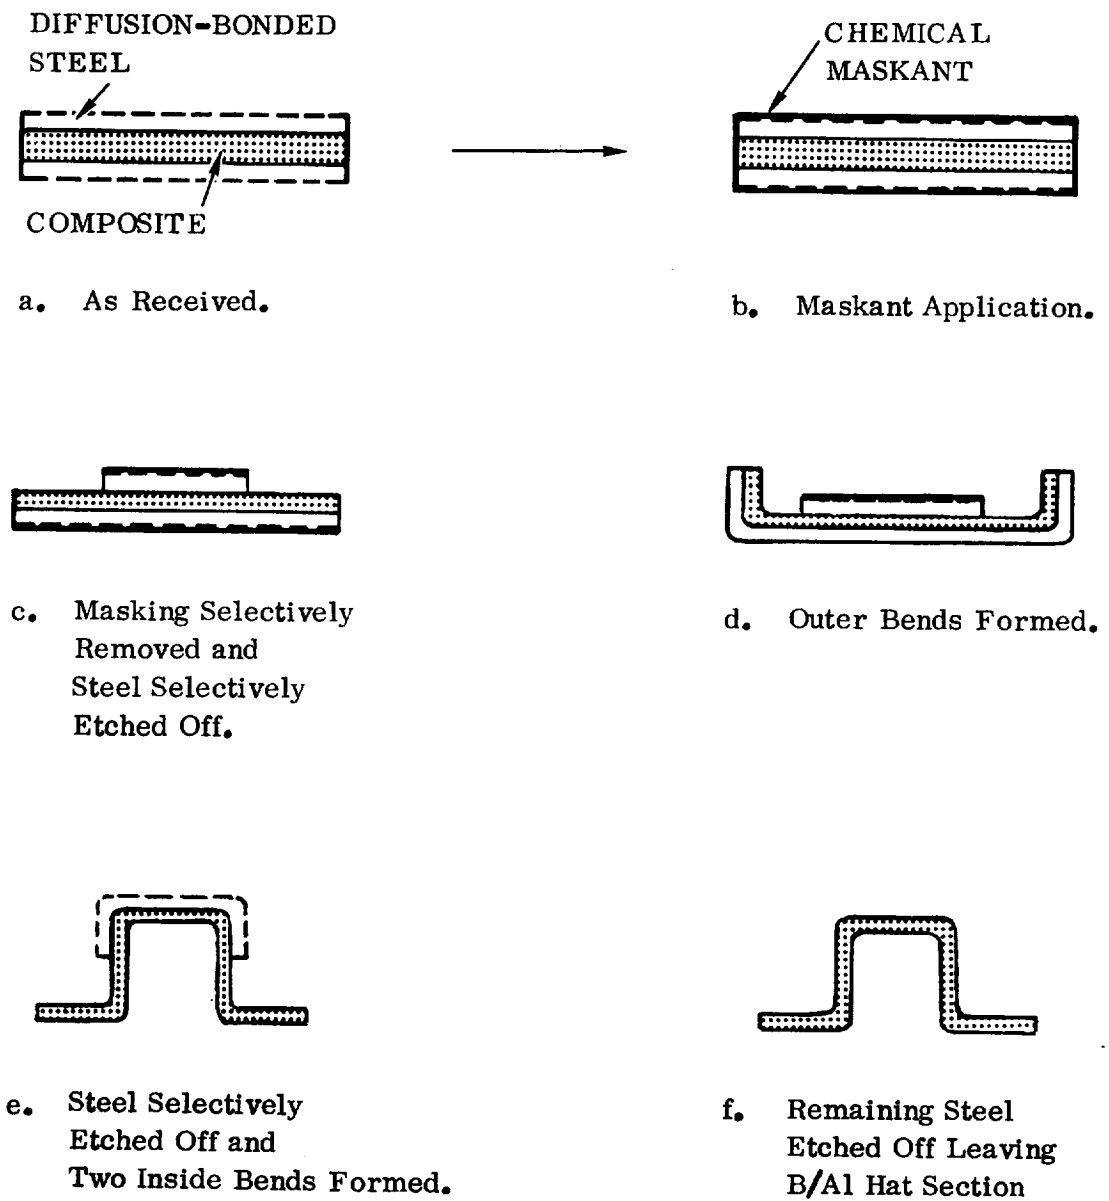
Selectively Placed Con Clad Forming Technique for Hat Sections
